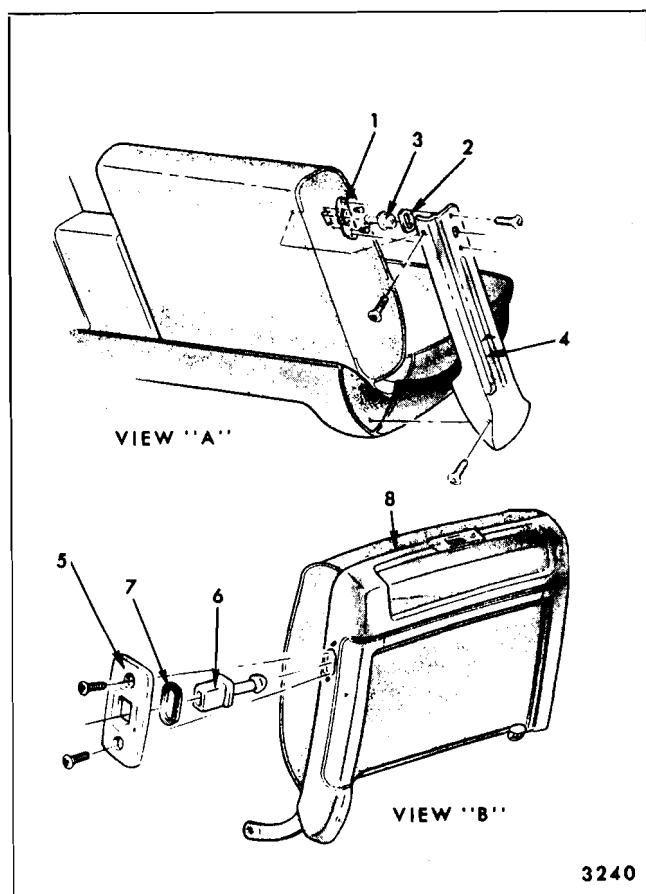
Seat Back Lock Push Button - "C & E"
